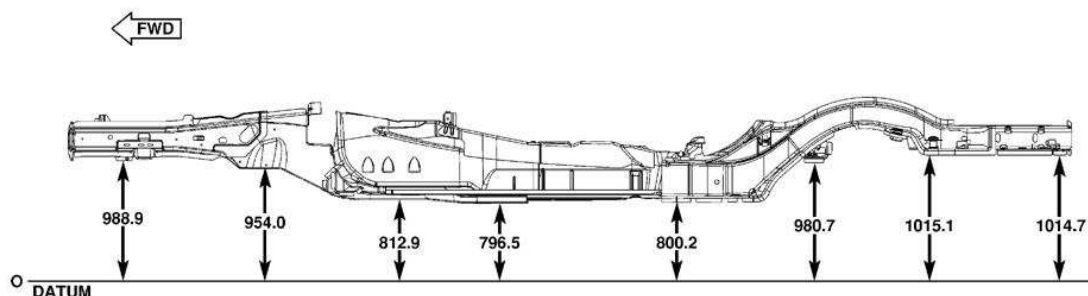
FRAME DIMENSIONS - BOTTOM VIEW
